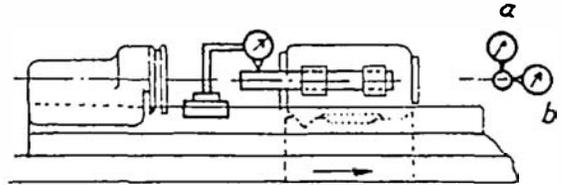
Parallelism between the Internal Grinding Spindle and the Table Movement
